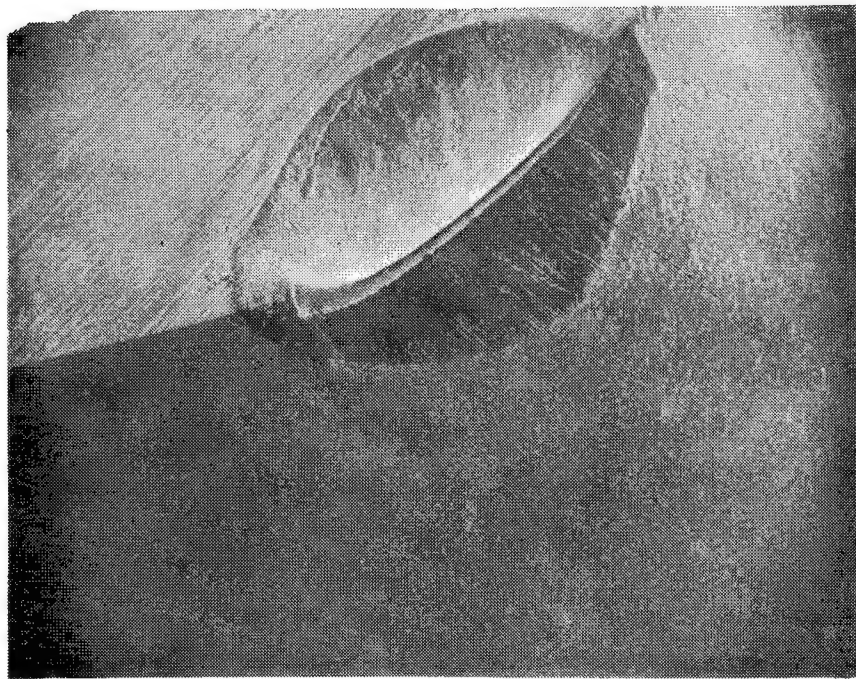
Photograph of a Typical Turning Test Tool for Fluid #1.
